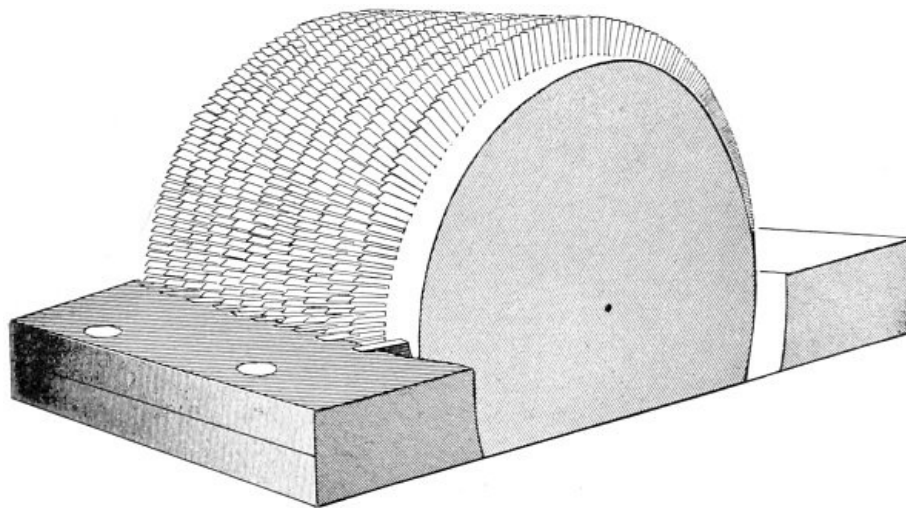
SHOWS THE ARRANGEMENT OF MOVING BLADES AND GUIDE VANES IN A PARSONS'S TURBINE. The top outer cover has been removed. The cylinder containing the revolving barrel has, as will be seen, a greater internal diameter than the diameter of the drum. It is the annular space thus formed through which the steam flows and which contains the revolving blades and the fixed guide blades. Between each two rings of moving blades there is a ring of guide blades, the latter being keyed into the containing case. The vanes are set at an angle, so that the steam acts on them as wind on the sails of a windmill.
